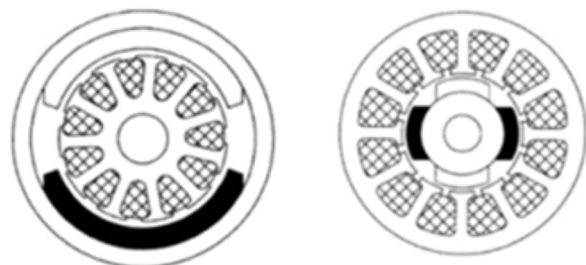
Cross sectional view of the rotor of the BLDC Motor.
